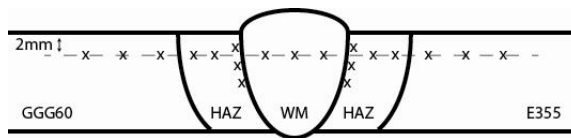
Locations of the hardness indentations on a joint weld cross-section
